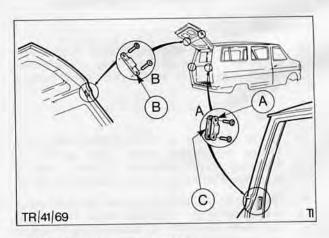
Tailgate bumper assemblies A – Bumber on body pillar
